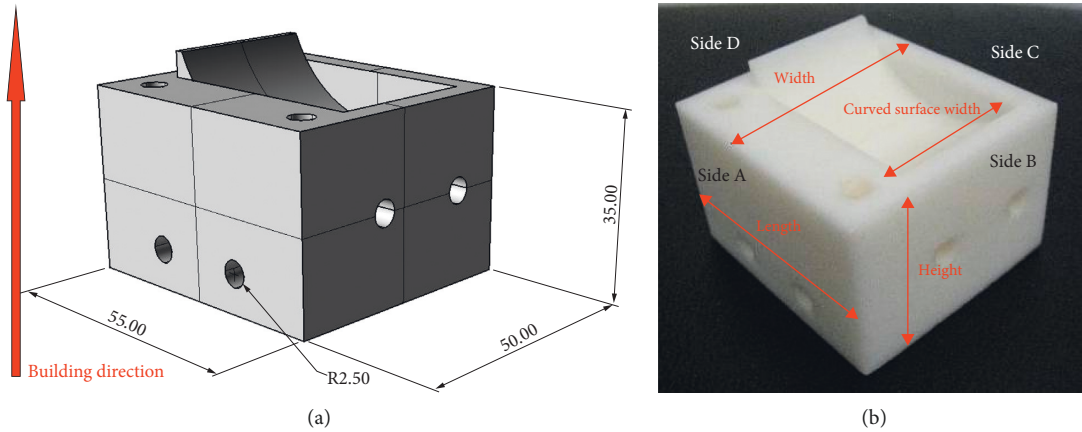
Geometrical design of the test piece (a) and measurements taken for the test pieces (b).
